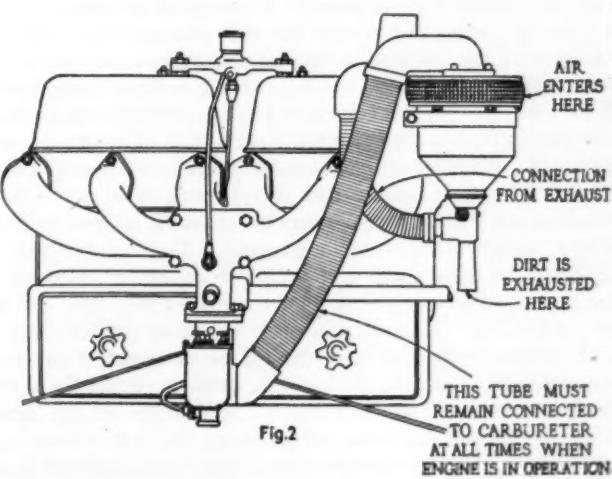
A good air cleaner installation. Flexible tube soldered to carburetor and cleaner. Gasket under flange on top of cleaner
